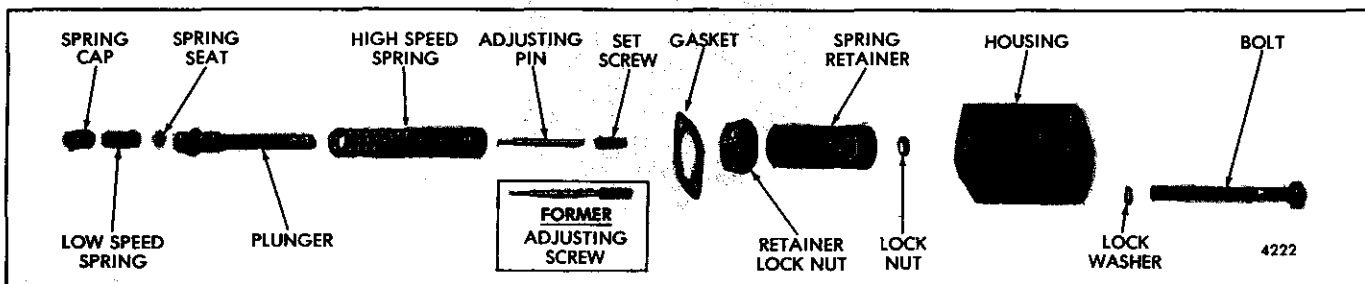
Governor Spring Assembly Details and Relative Location of Parts
